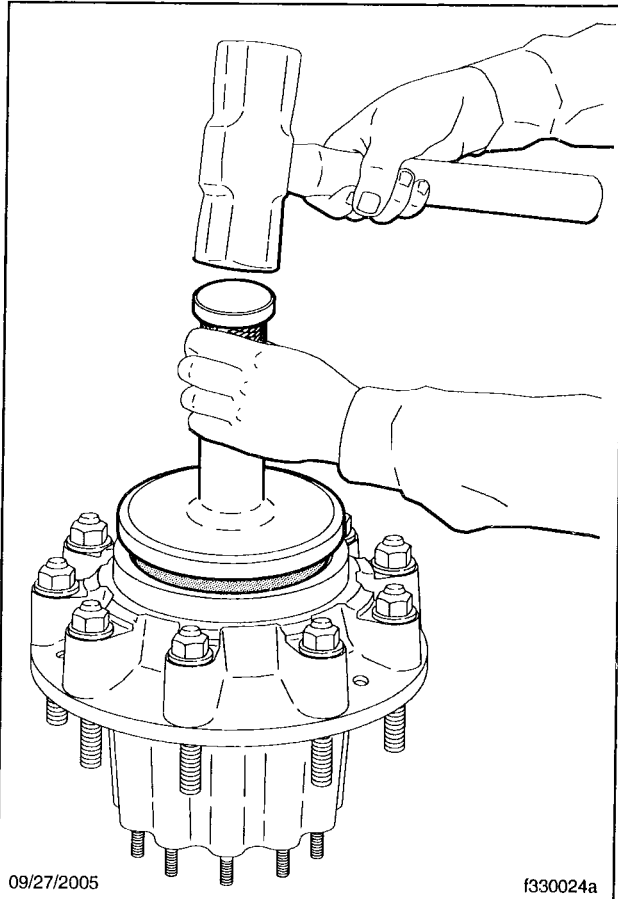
, Insert the Tool in the Hub Bore (typical installation shown)
